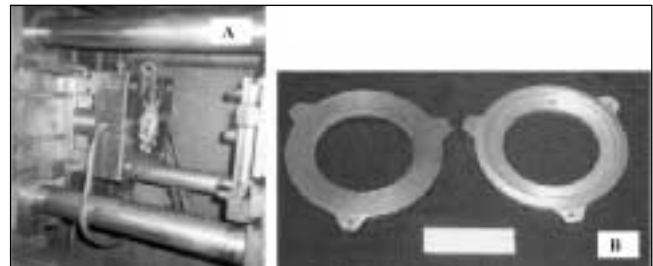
A) Demonstrator clutch disc within the HPDC mould (AlSi8Cu3Fe + TiB₂ (6%wt.) particles), B) Machined component.
